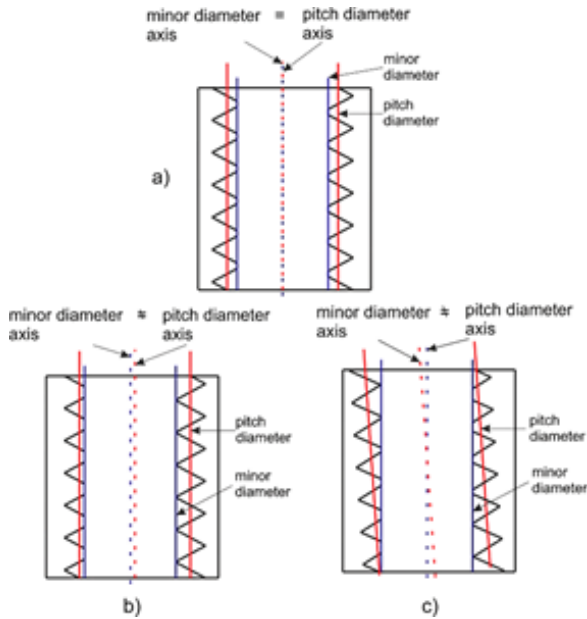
Position and orientation of the threaded hole diameters axes: a) perfect thread, b, c) actual shape of threads
